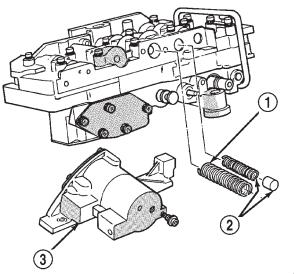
3-4 Shift And Converter Clutch Valve Springs And Plug
